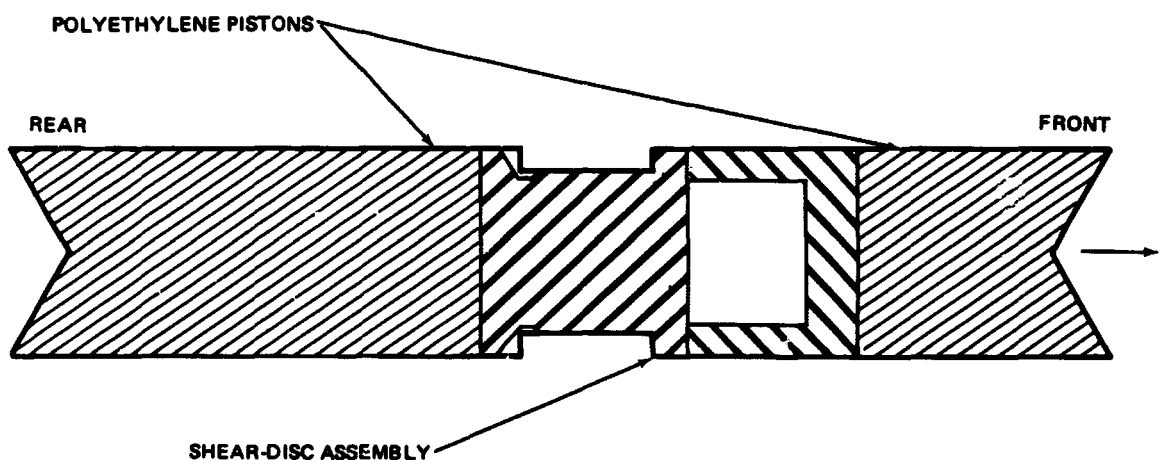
Piston Assembly With Typical Collapsible Mechanism
